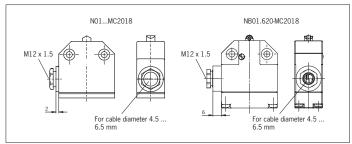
Dimension drawing for N01...MC2018/NB01.620-MC2018 with special cable gland
